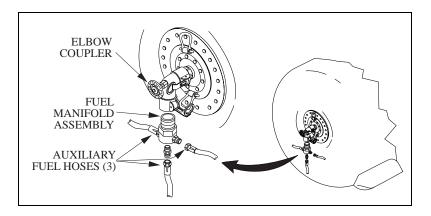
Three auxiliary hoses with the fuel manifold assembly
